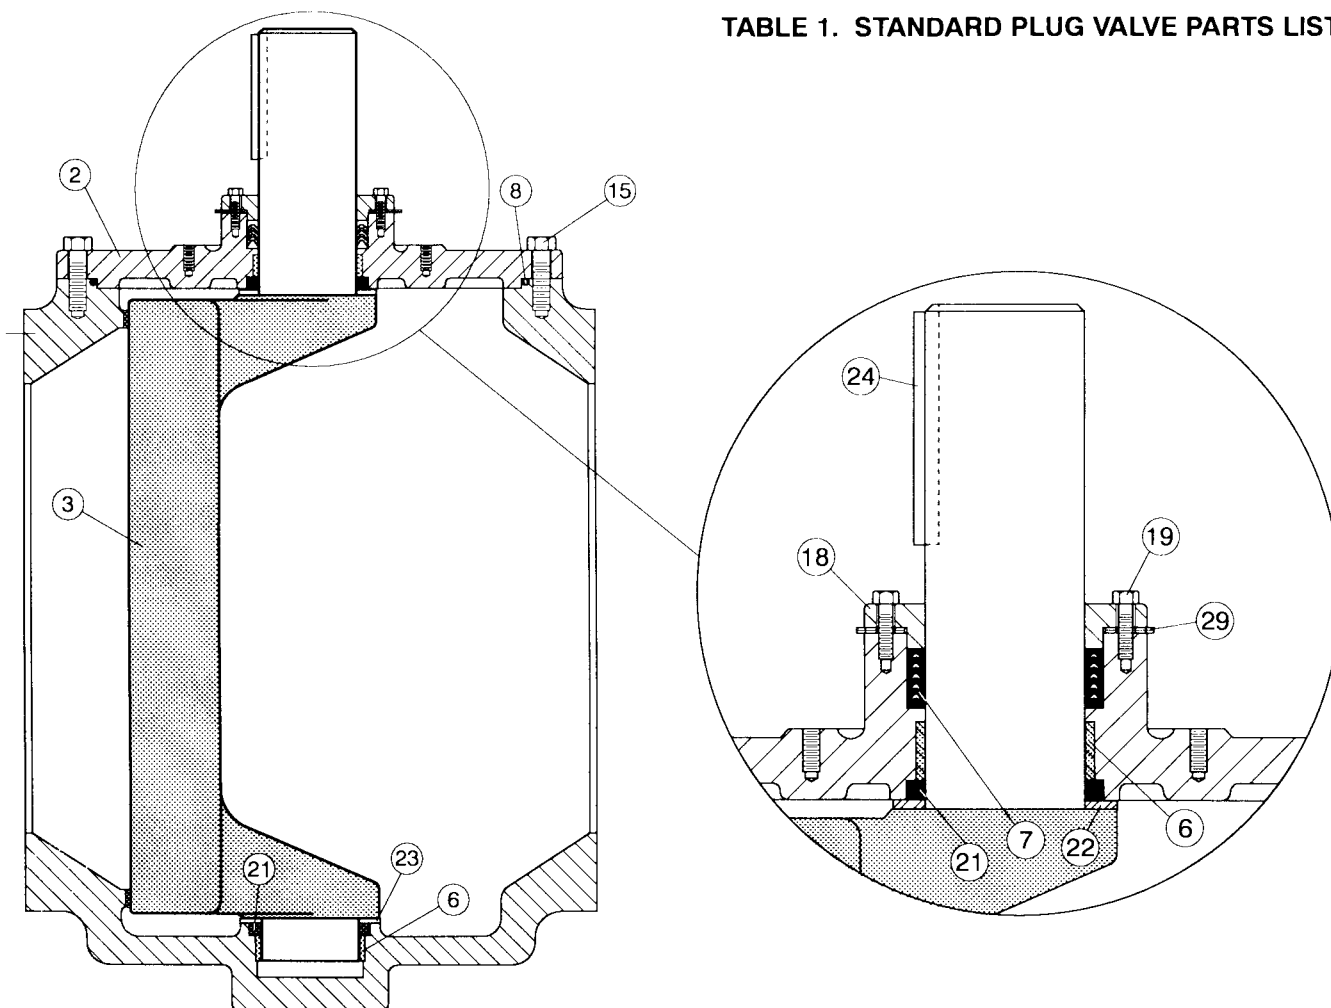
STANDARD PLUG VALVE CONSTRUCTION
